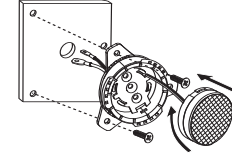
A through 7D. The Starfish™ tweeter mount is intended to be used when the tweeter will be installed behind a factory grille (e.g., replacing the factory tweeter behind a door panel). The Starfish will allow you to mount the component tweeter directly to the panel itself or to the area behind the panel. The six mounting tabs can be removed easily to create a number of custom configurations.
